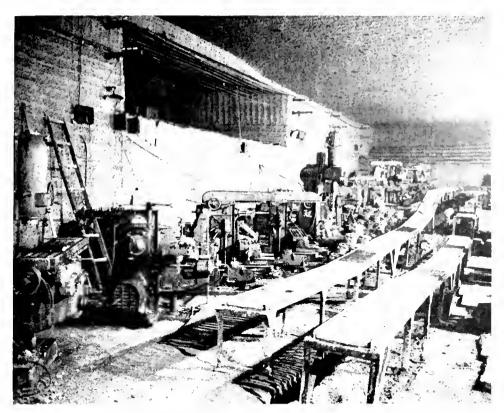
Cylinder head shop, Tomura plant at Oya Works.
